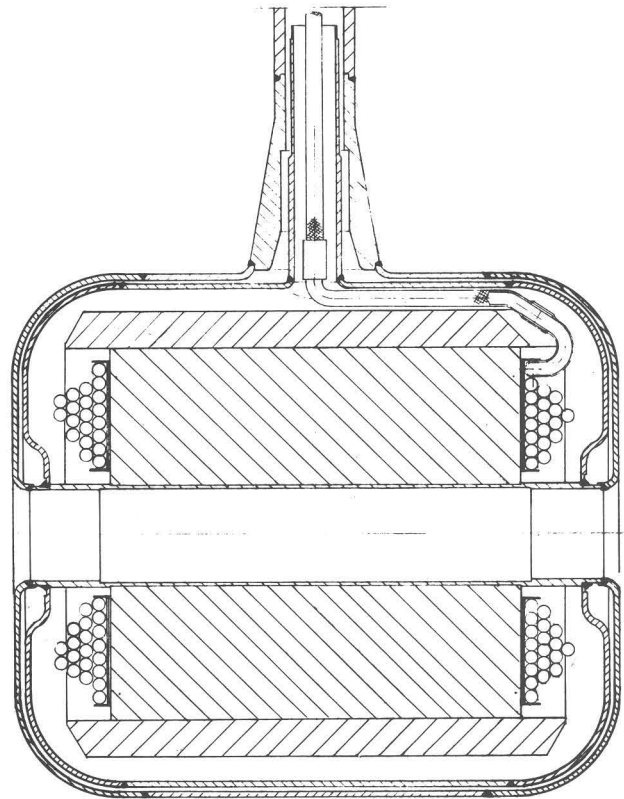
Drift tube assembly. The quadrupole is supported by the bore-tube and held in place by a positioning screw in the second stem base. Joints of caps, bore tube, cylindrical body and stems are welded to plating.
